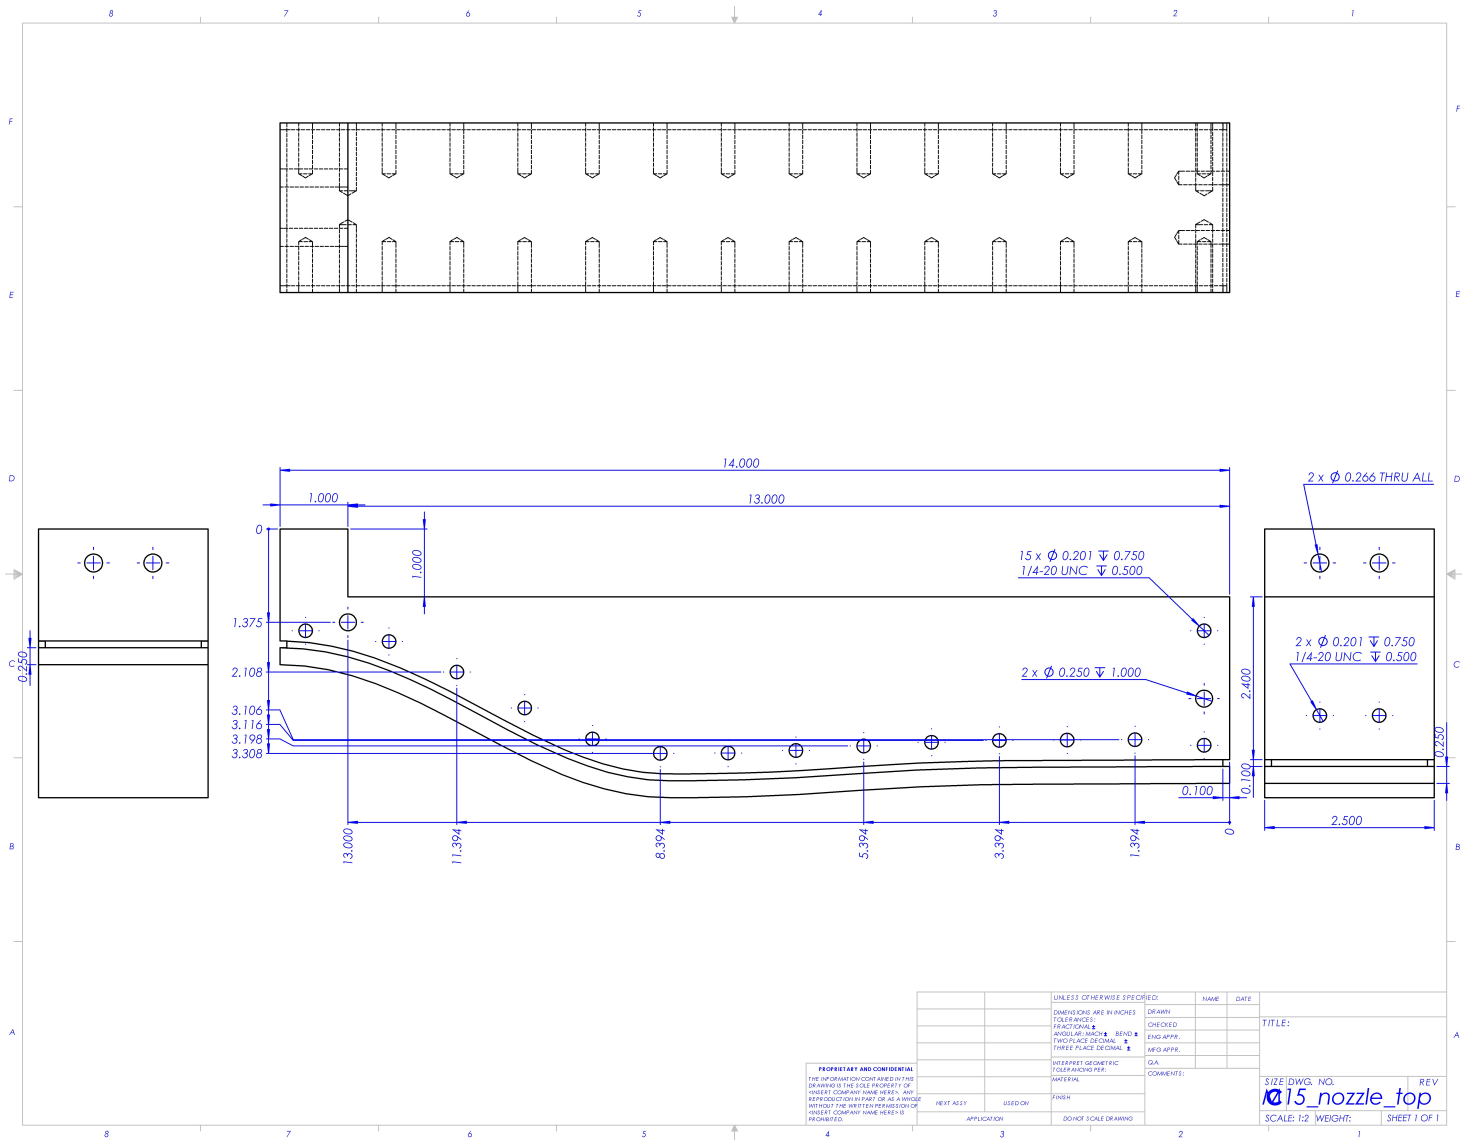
Drawing of Mach 1.5 Nozzle Contour
